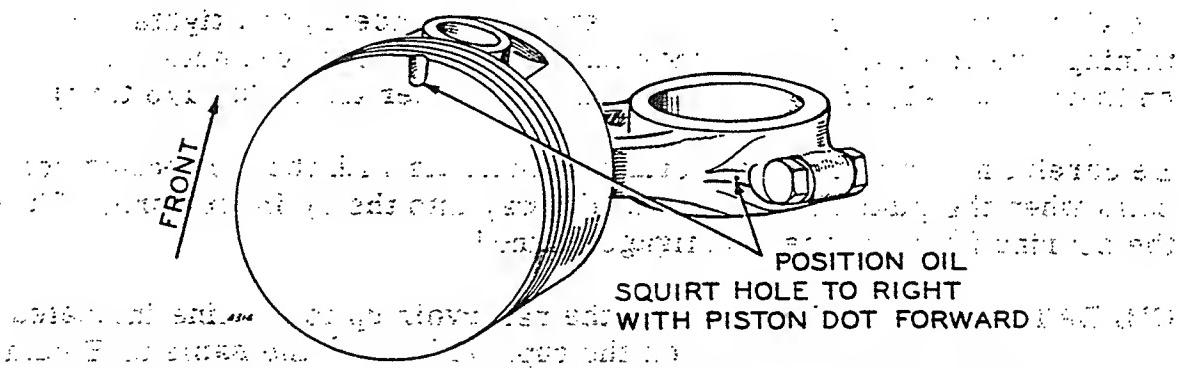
PISTON AND CONNECTING ROD ASSEMBLY
